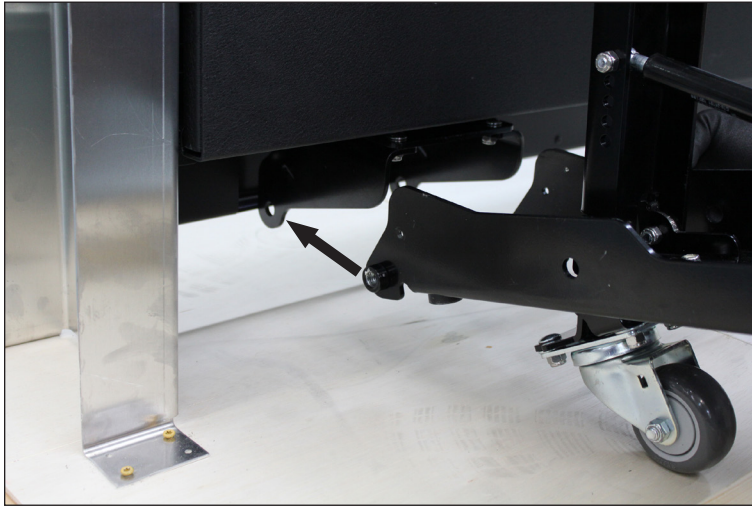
Line up Caster Base Assembly with Caster Base Vert
